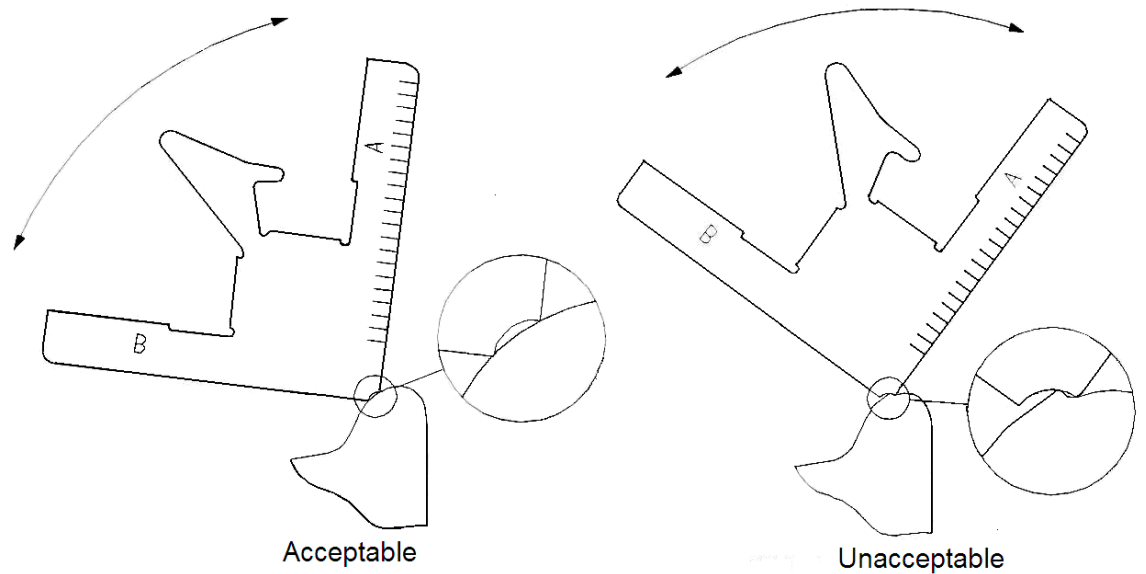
Flange toe radius assessment using a flange height and thickness gauge
